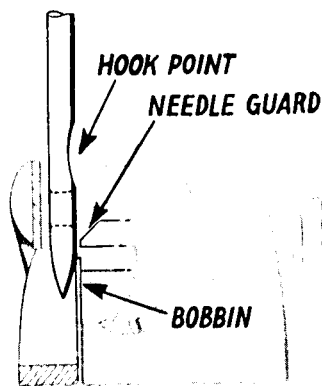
Showing Needle Striking Bobbin Due to Removal of Too Much Metal From Needle Guard
